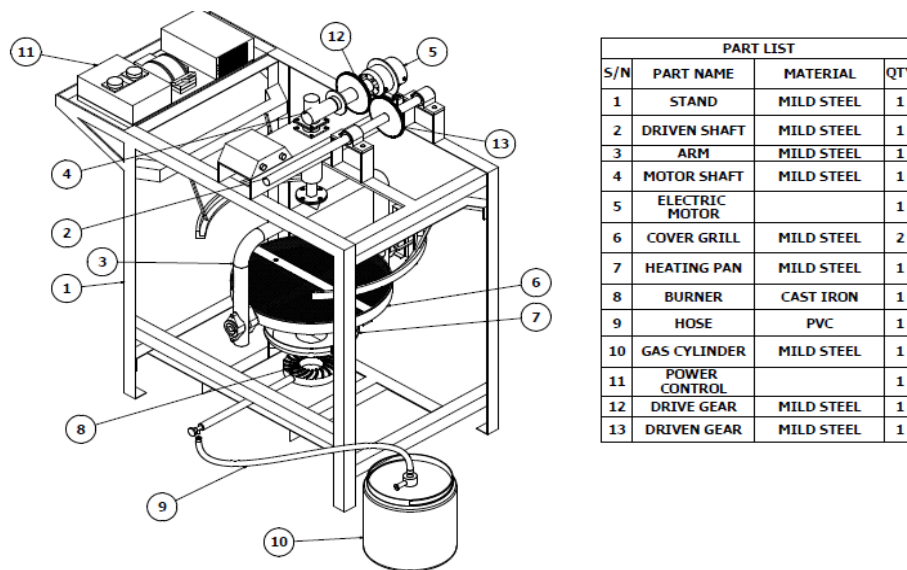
Isometric View of the Gas Fired Meat Roasting Machine
